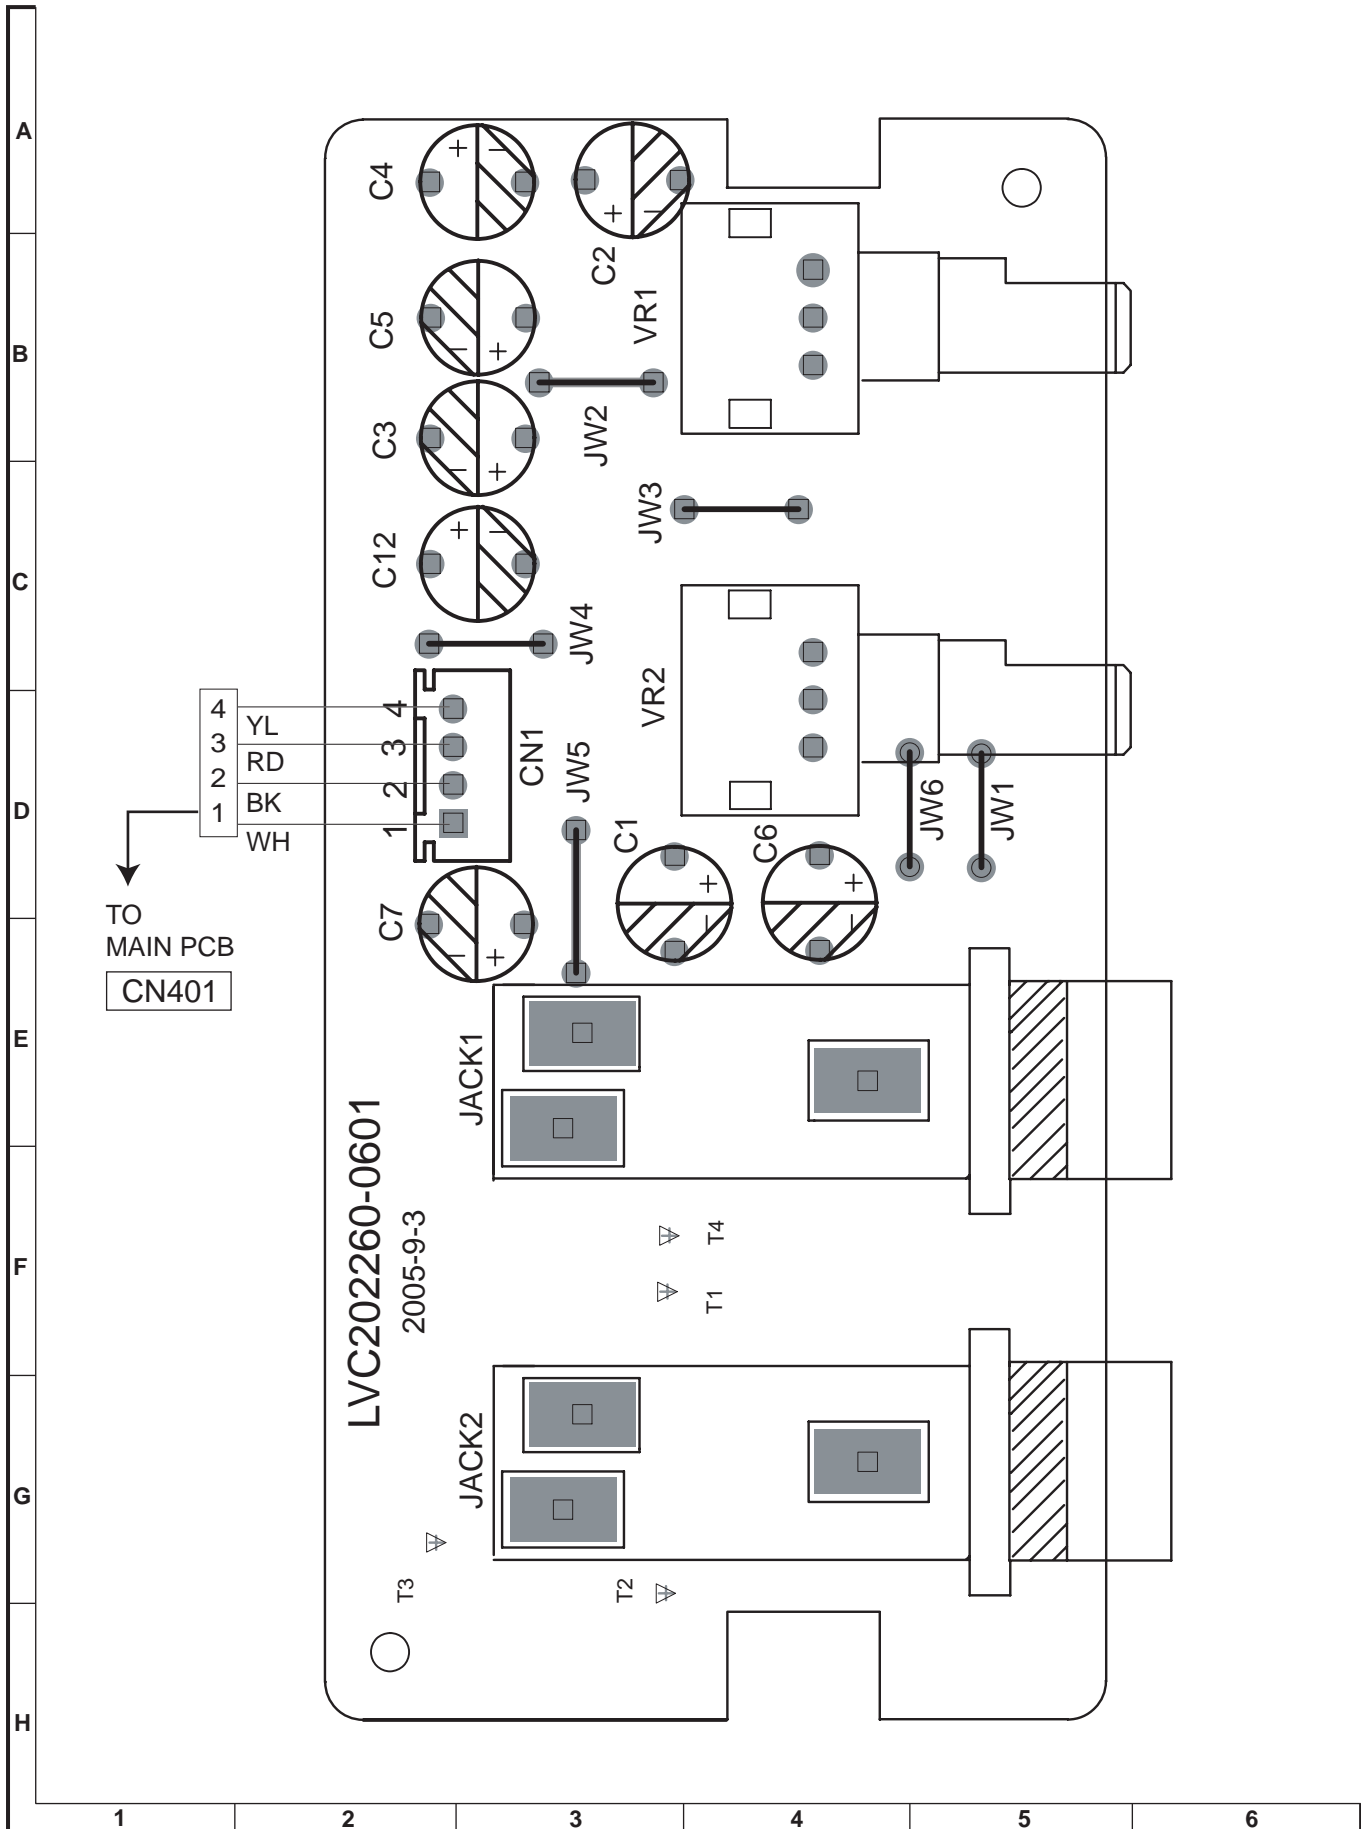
WIRING SIDE OF KARAOKE PCB (TOP VIEW)
